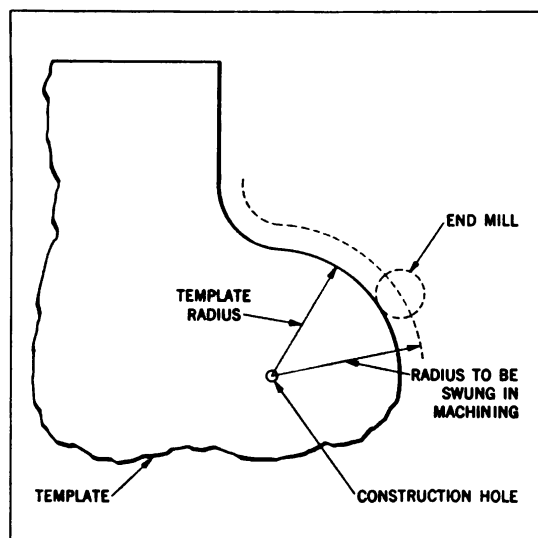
Relation of spindle axis, cutter and rotary table in machining templates on a Jig Borer.
